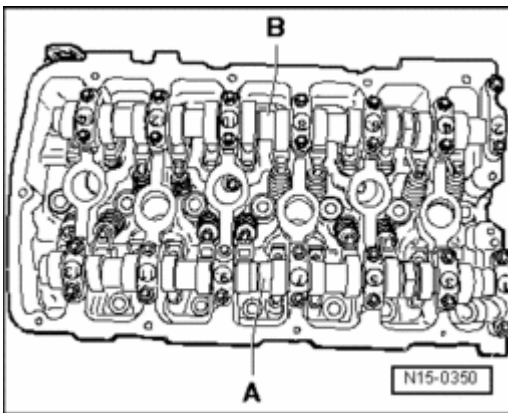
Identifying Intake Camshaft And Exhaust Camshaft
